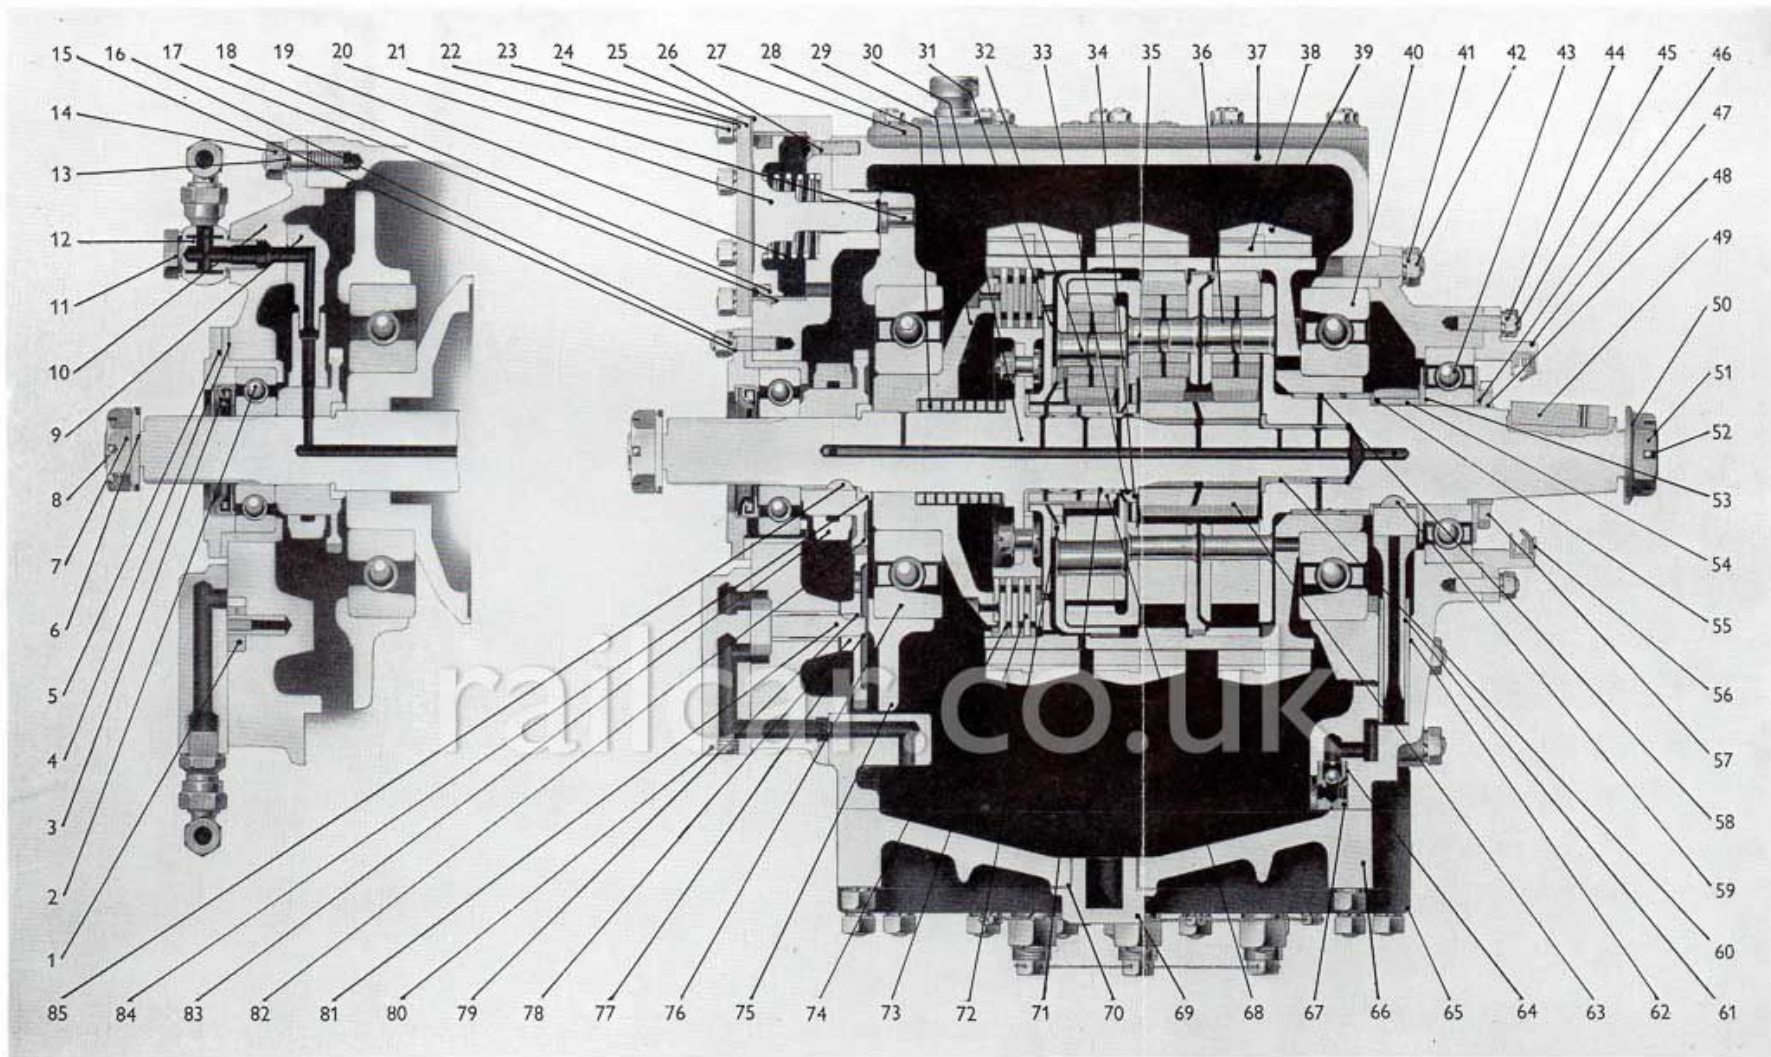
SECTION THROUGH GEARBOX. LIST No. 5742-5743.
